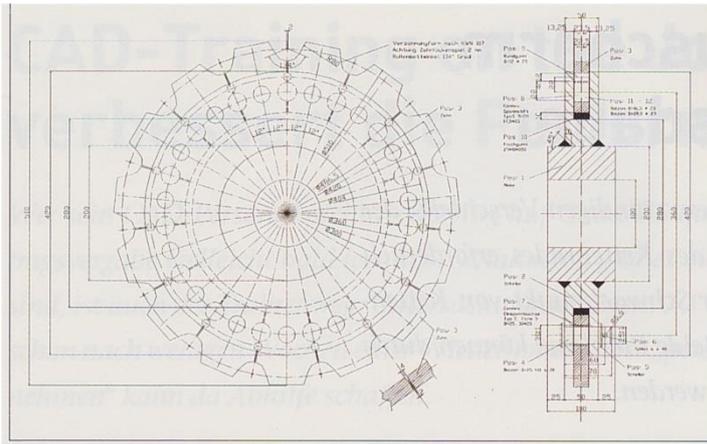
Drawing of the self-adjusting chain sprocket in the test field
